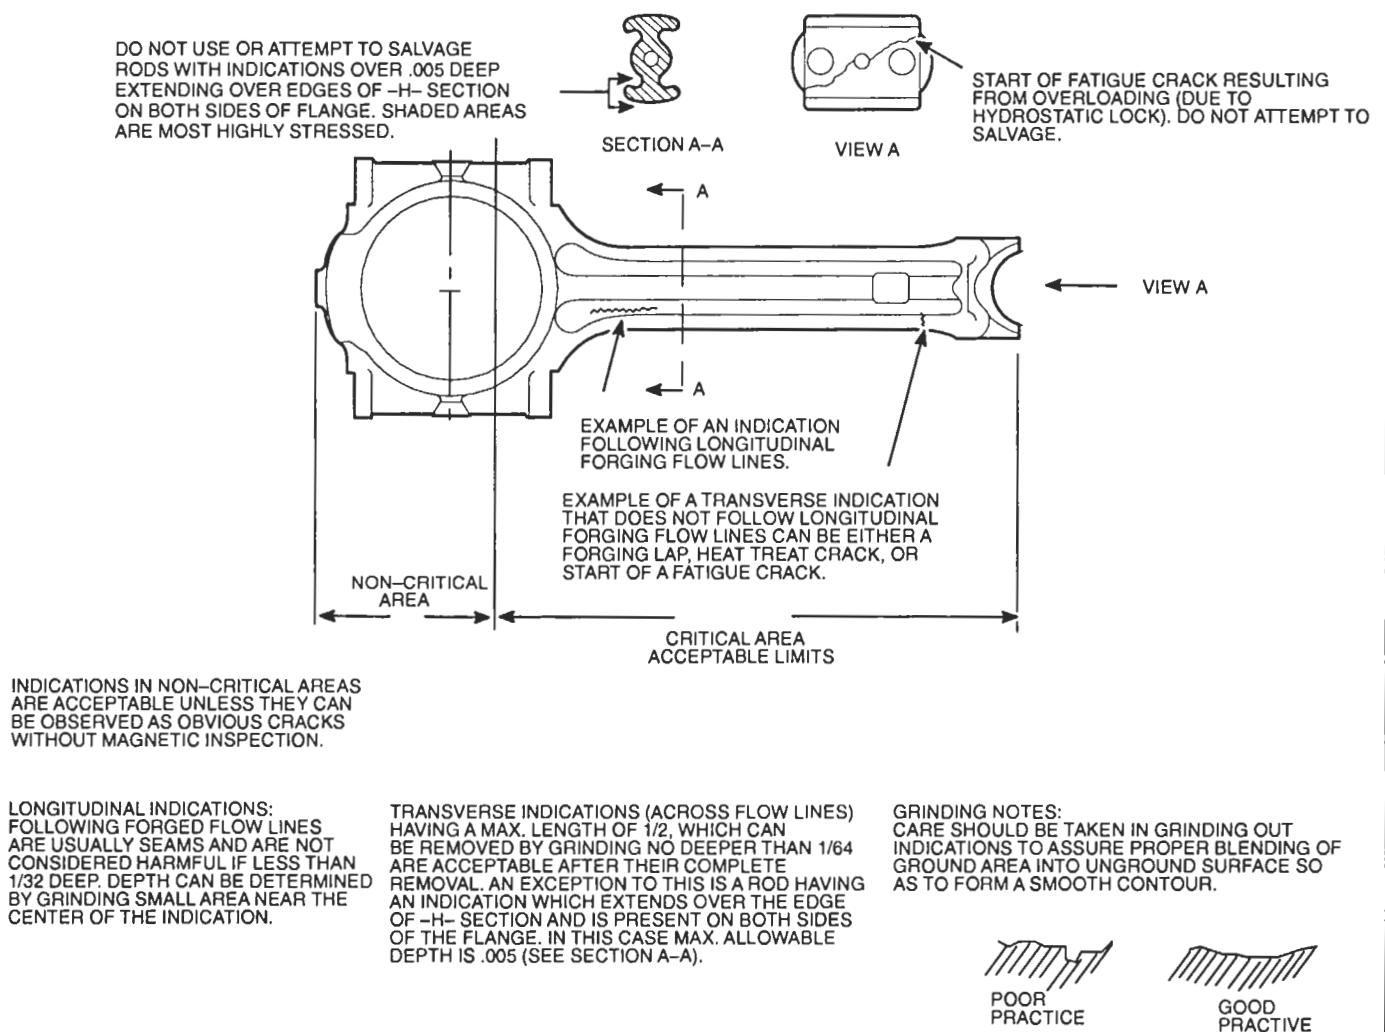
Magnetic Particle Inspection Limits for Connecting Rod
